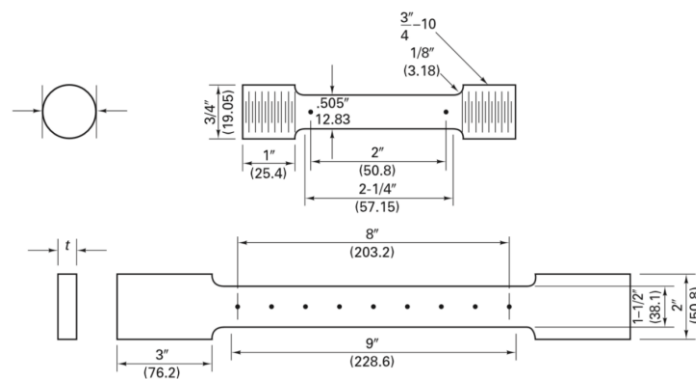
Two common types of standard tensile test specimens: (a) round; (b) flat. Dimensions are in inches, with millimeters in parentheses.
